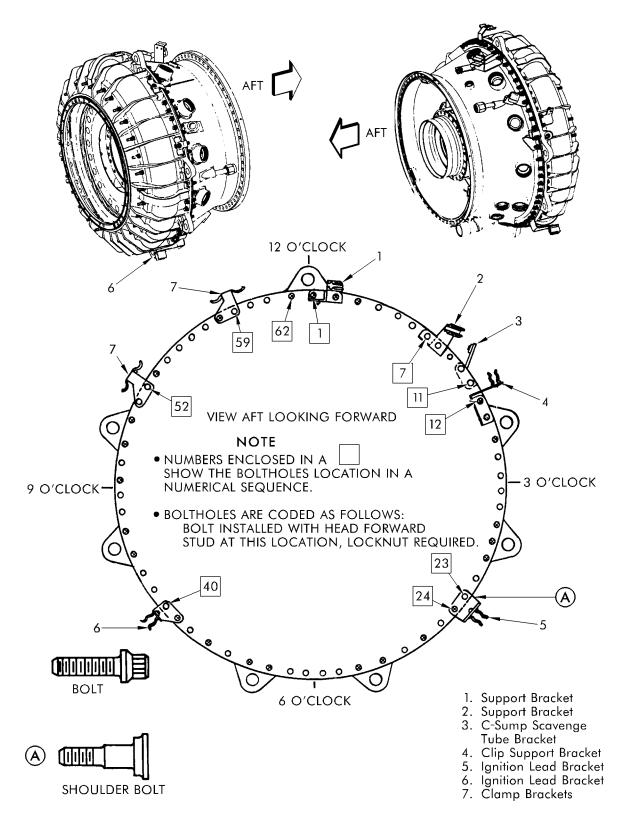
Diffuser Case-to-Midframe Casing Assembly; Bolt Diagram
